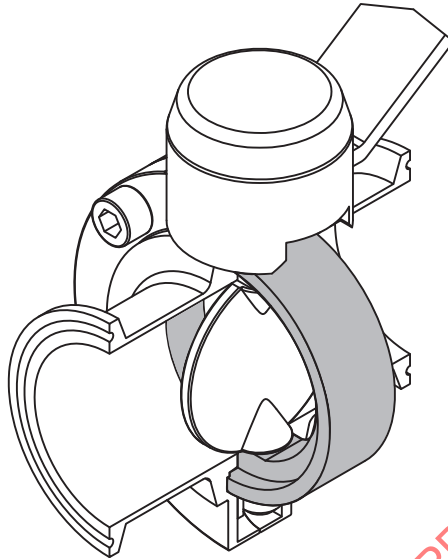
Back Pressure Control Valve
